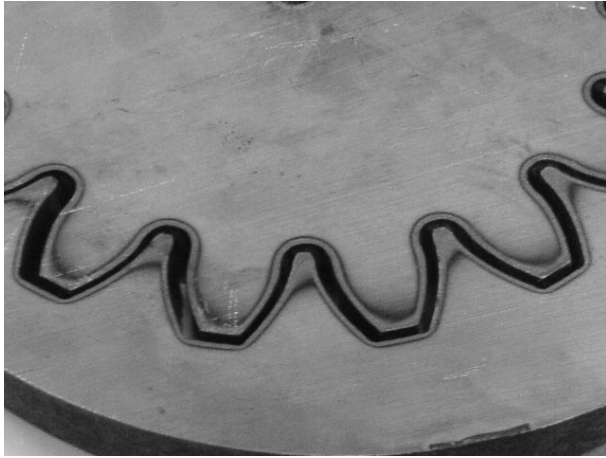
Burnt of gear-wheel cutting by new generation plasma type Hypertherm HyDefinition HD4070
